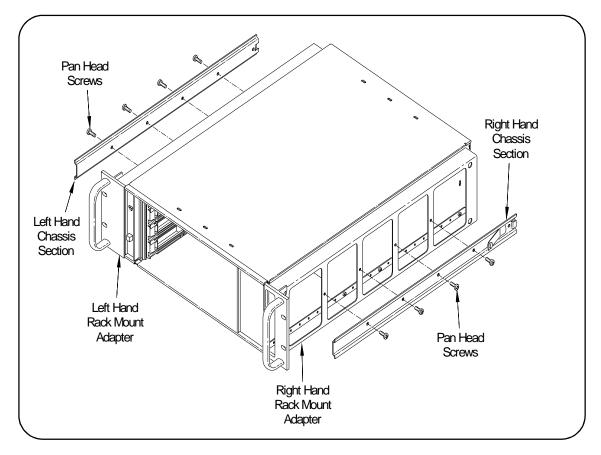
Connecting Chassis Section to Rack Mount Adapters
